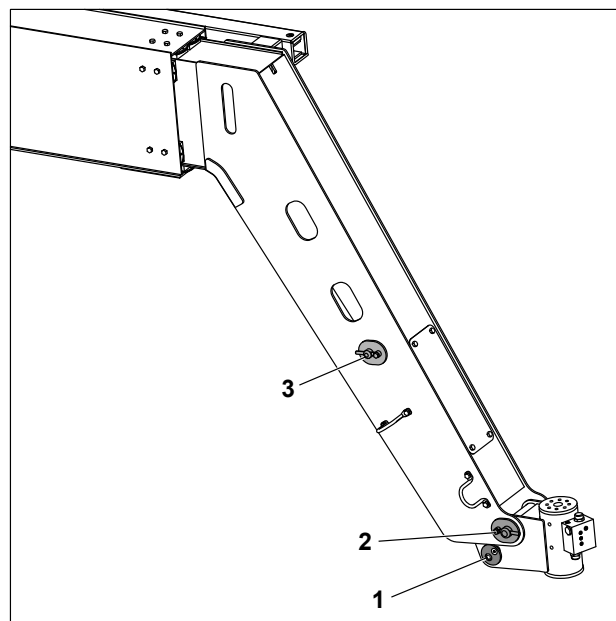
Reassembly of Components-Rotator and Leveling Cylinder
